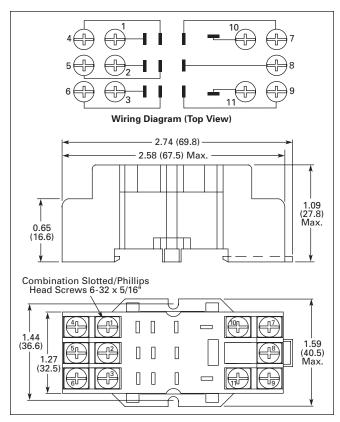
D7PA3 Standard Mount — Approximate Dimensions in Inches (mm)
